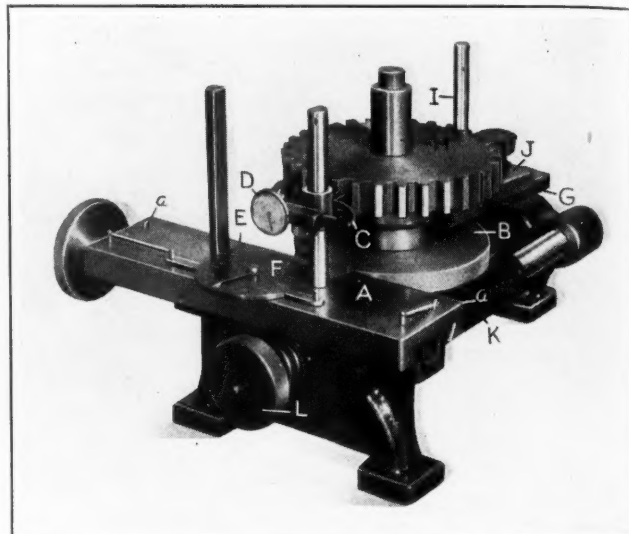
Involute Curve Testing Machine used for inspecting a Finished Gear
